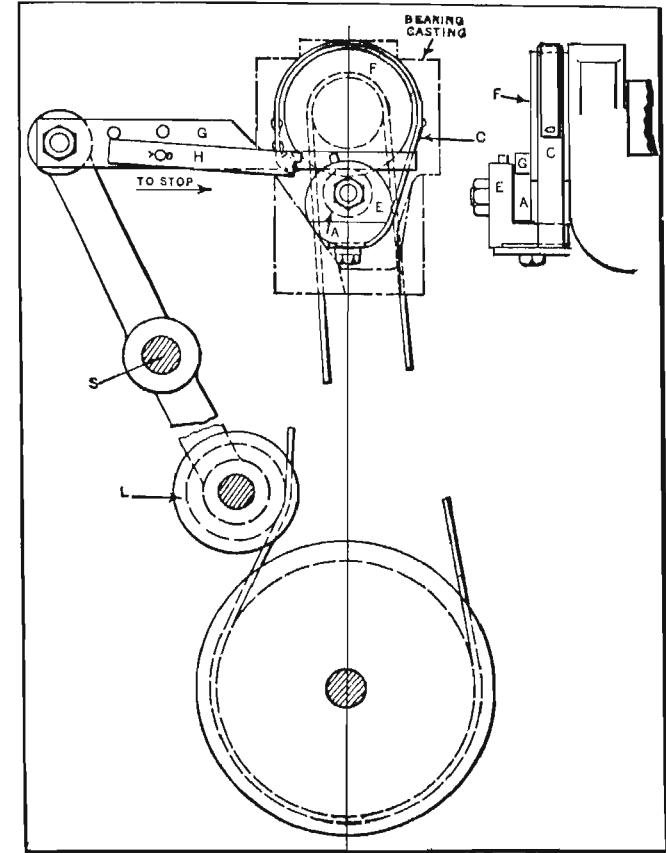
Stop Mechanism which Slackens Driving Belt and Applies Brake
